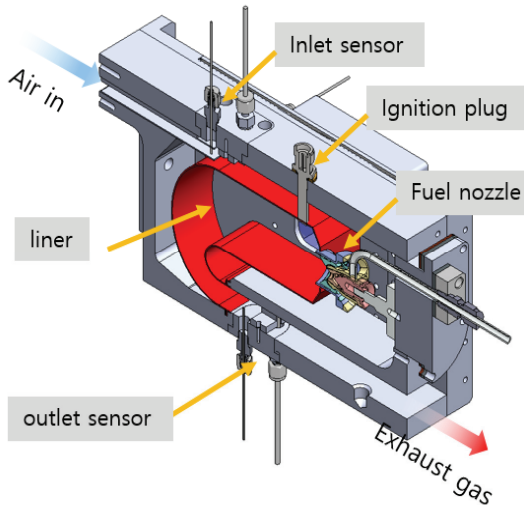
Combustor sector test ring. (Inner chamber cross-section)
